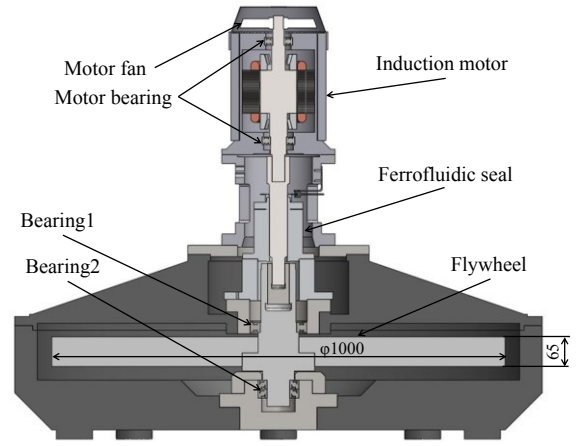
Configuration of a proposed flywheel system that employs the general purpose motor and ball bearings.
